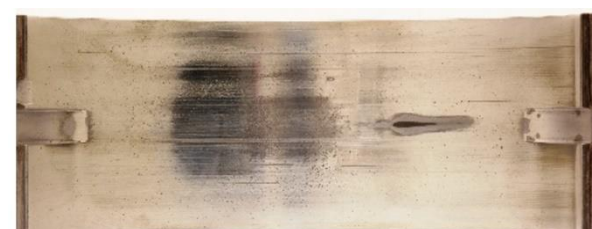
a) A Miba03 upper rod bearing underwent 2250 MWh operation in a locomotive
